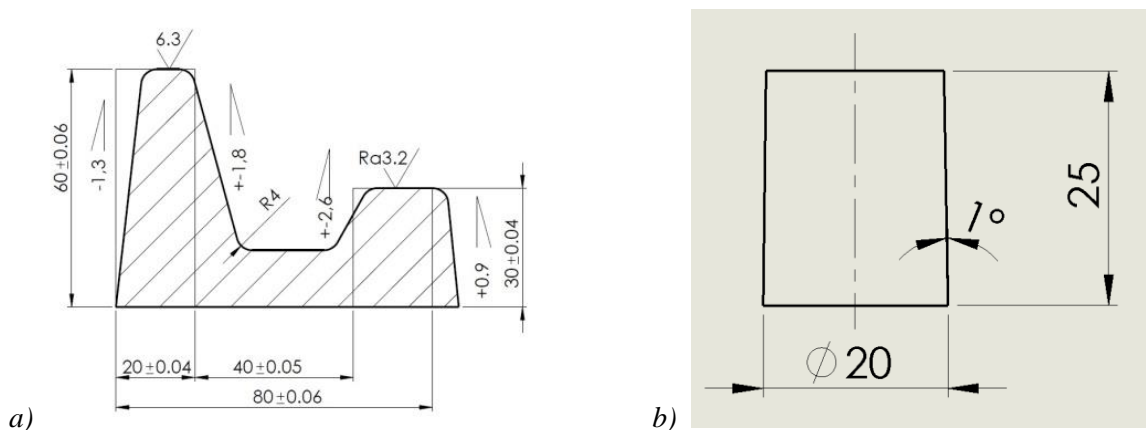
Testes samples: a) example of typical casting model; b) tested samples.
